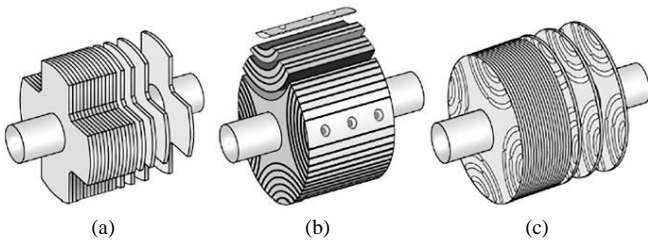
Types of SynRM machines: a) Salient pole; b) ALA-type rotor; c) TLA-type rotor.
